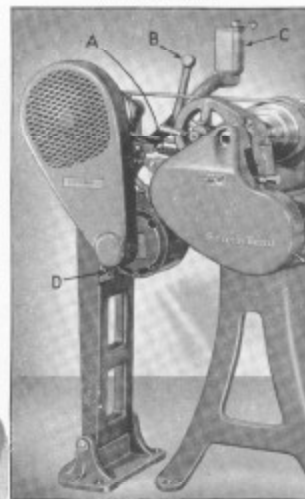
16-inch Quick Change Gear Pedestal Motor Driven South Bend Metal Working Lathe.
